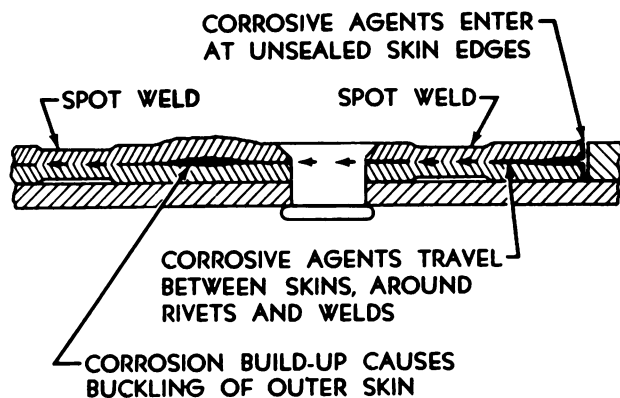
Spot-welded seam corrosion points. AM.56
